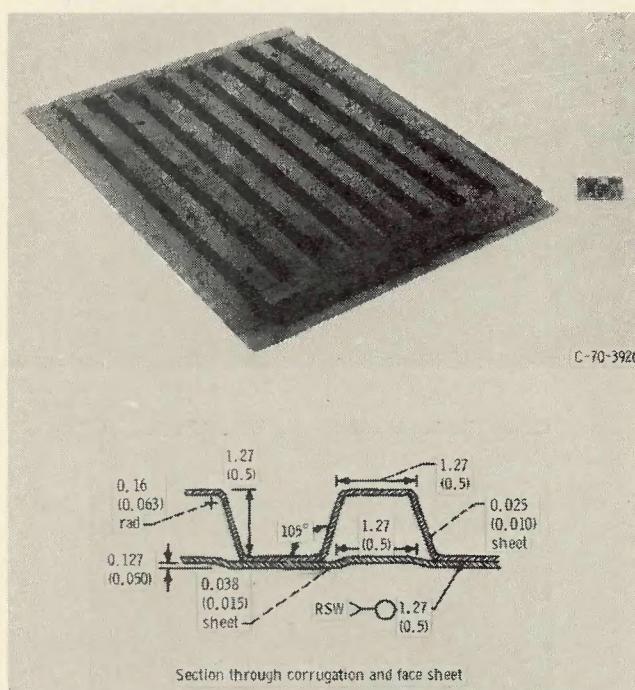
Proposed TD-NiCr heat shield for space shuttle. Dimensions are in centimeters (in.). Face sheet, 0.038-centimeter (0.015-in.) thick TD-NiCr sheet. Rib structure, 0.025 centimeter (0.010-in.) thick TD-NiCr sheet spot welded to face plate. Surface finish, produced by grit blasting with Al₂O₃ and oxidizing for 1 hour at 1204C (2200F). Structure produced under USAF contract by McDonnell-Douglas Corp.
